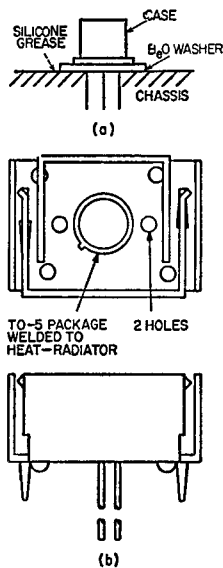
Suggested mounting arrangements for transistors having a JEDEC TO-5 package: (a) without heat sink; (b) with fin-type heat sink.
